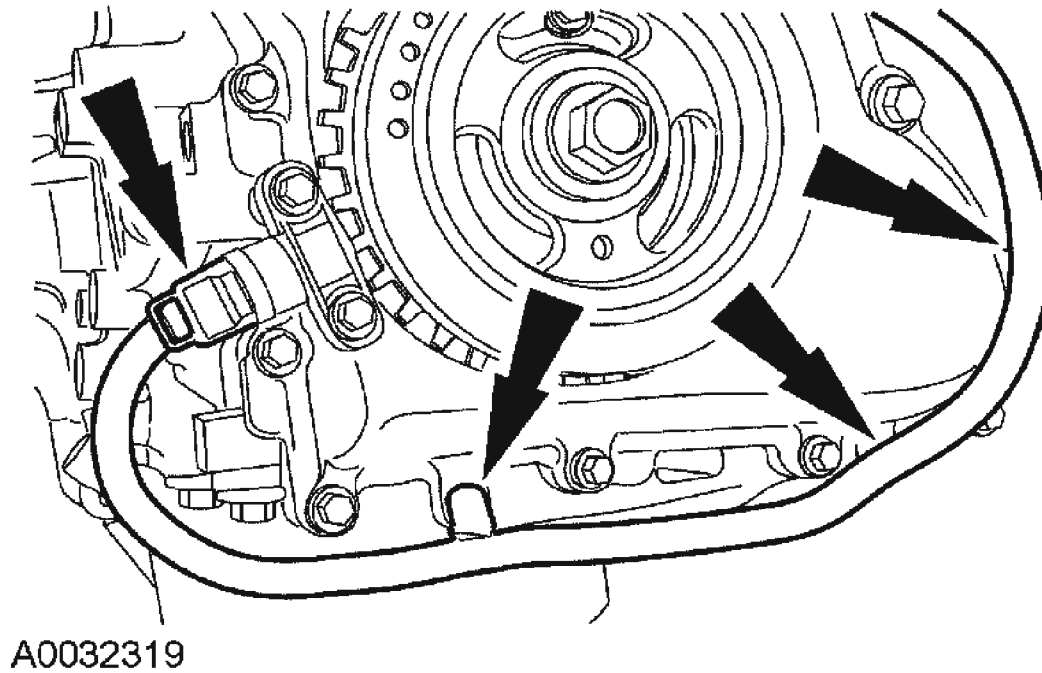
Disconnecting Crankshaft Position Sensor And Wiring Harness Pin-Type Retainers
